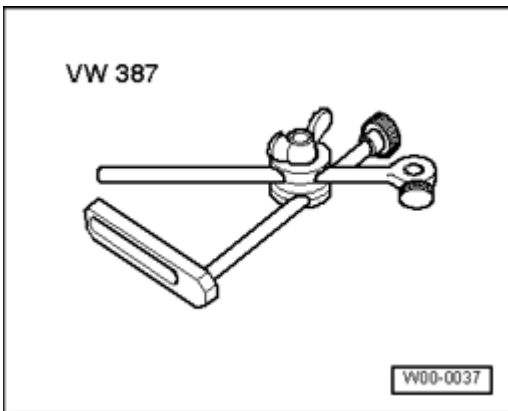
Identifying Universal Dial Gauge Bracket VW 387
